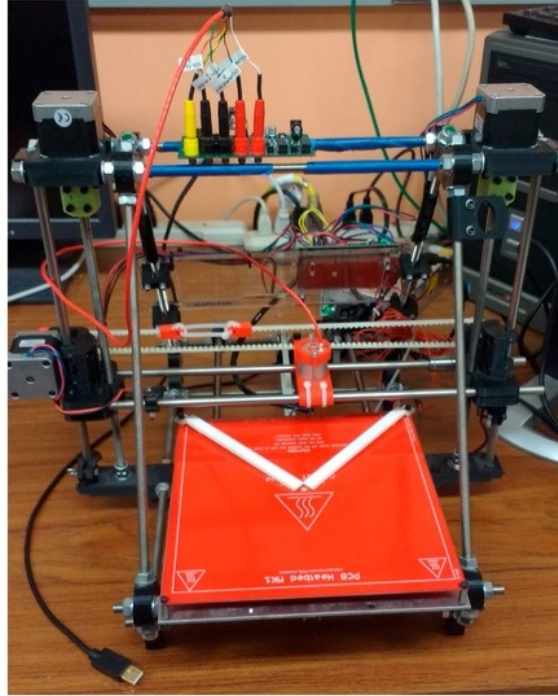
Modified 3-D printer with custom measurement circuit for OS4PP measurements.
